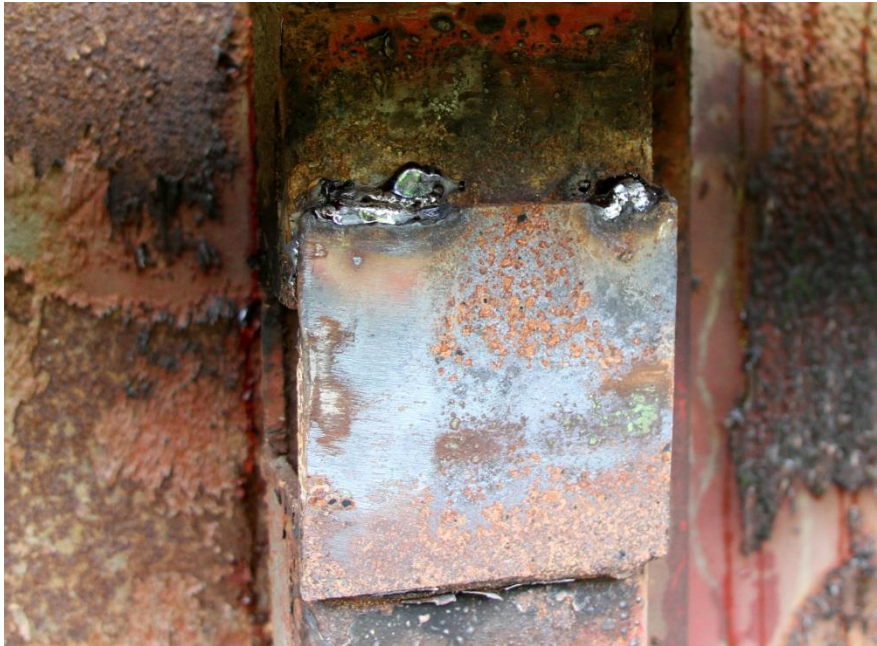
Weld not performed in a professional way, trailer container.
